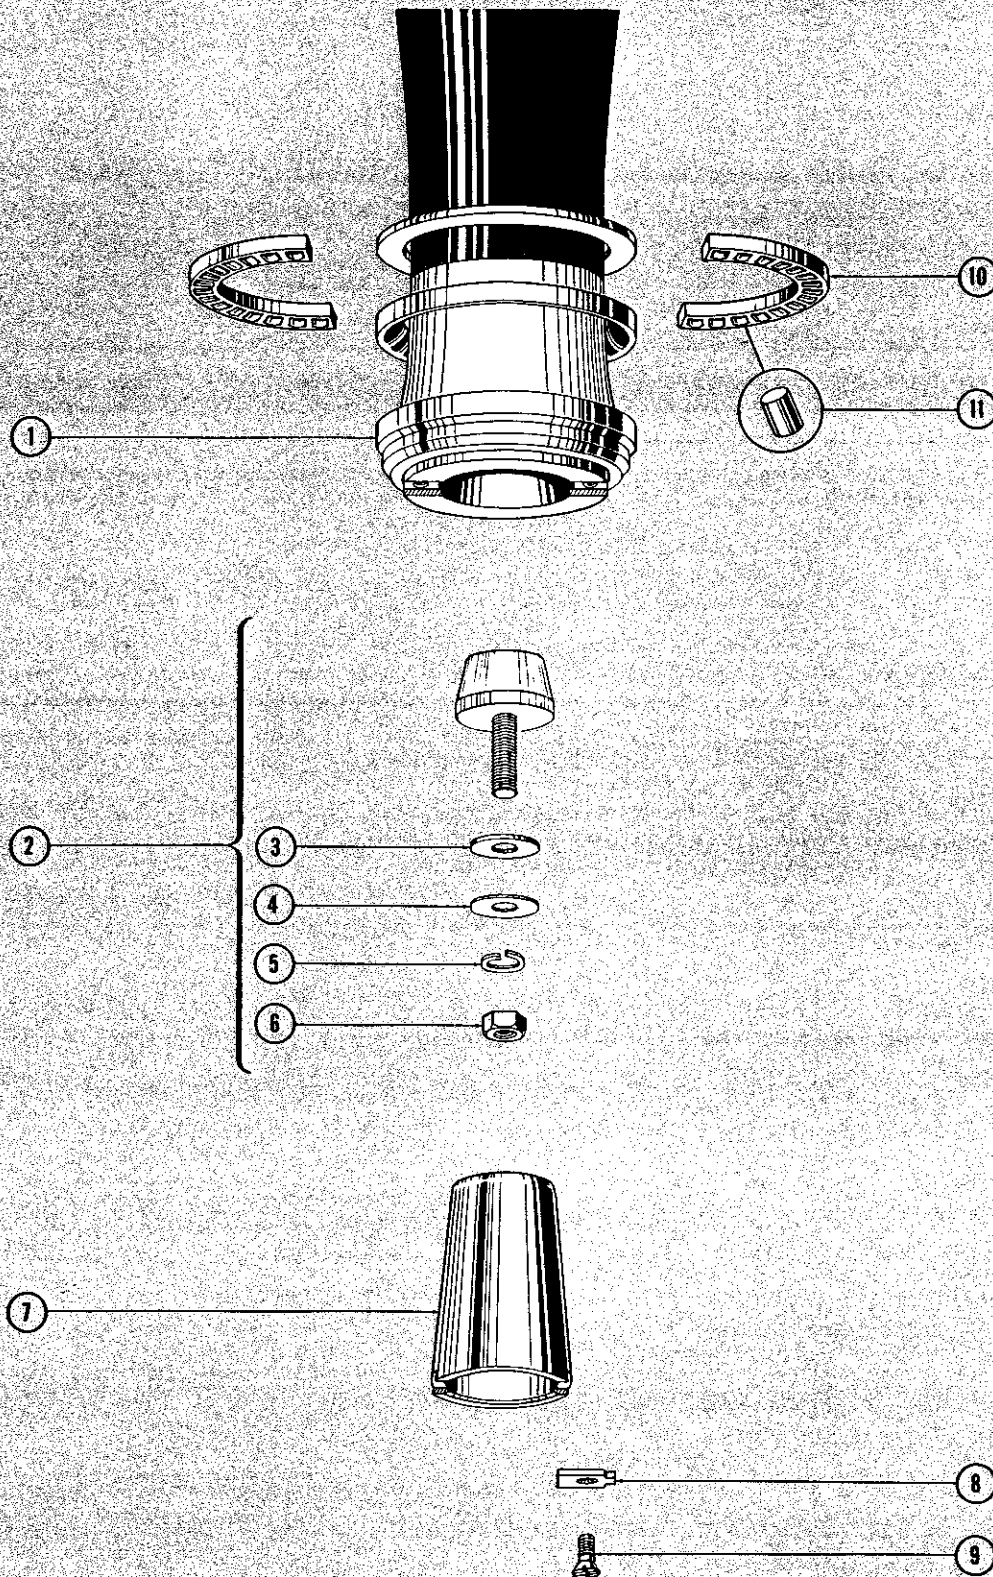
Counterweight Type "B" Shank Blade Assembly
